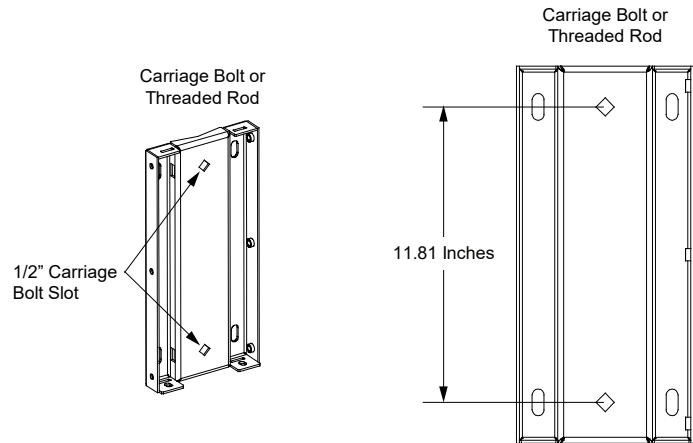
Installing the Battery Handle Bracket to the Battery
